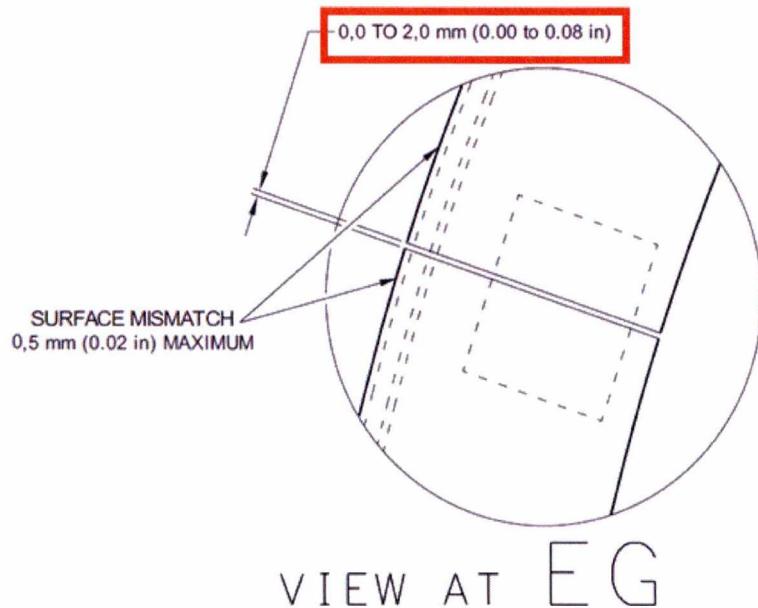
Gap between Diaphragm Assemblies (Referred from Fitting Instruction Drawing: KH12724)
